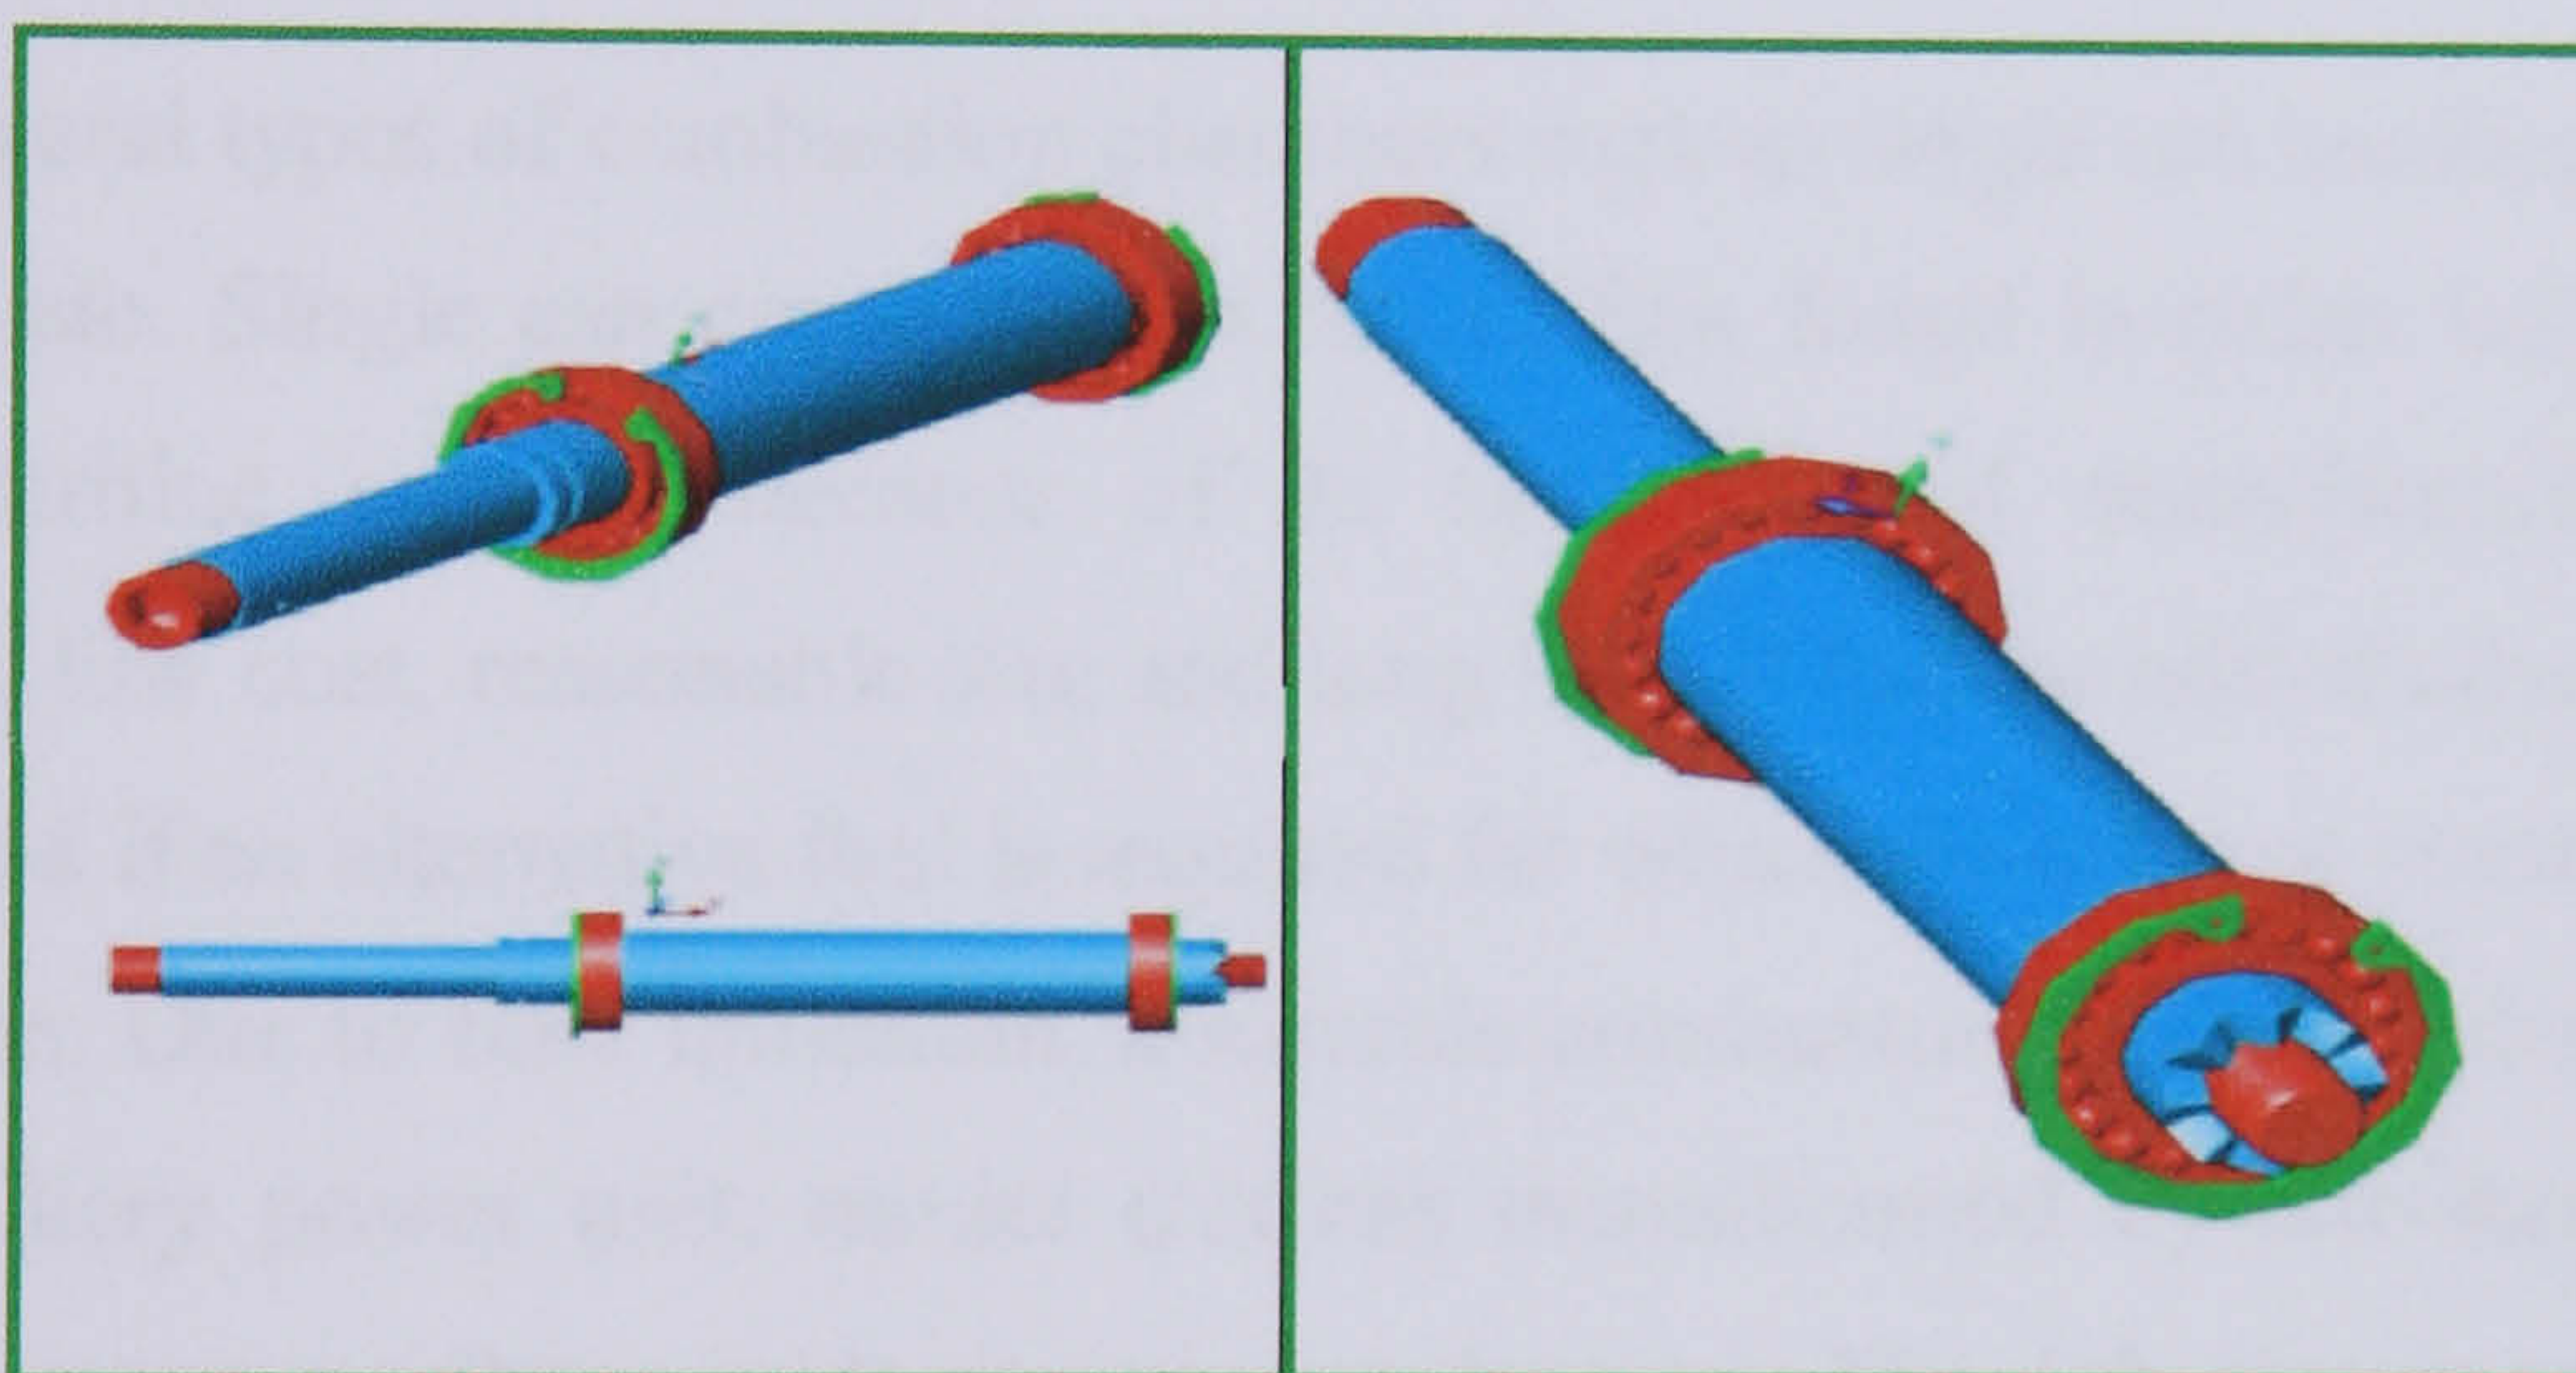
THREE DIMENSIONAL SOLID MODEL OF THE SHAFT ASSEMBLY WITH THE BEARINGS
